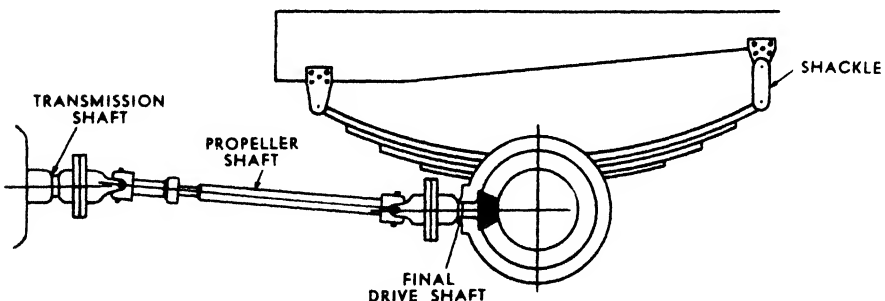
AUTOMOBILE DRIVE SHAFT.
